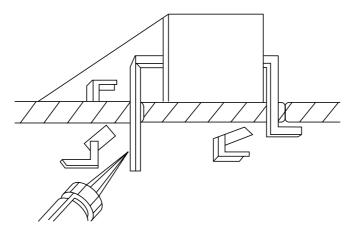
USE SOLDERING IRON TO PRY LEADS
